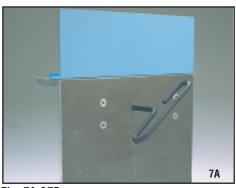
A &7B Type 1L Latch and slot Receiver coupling metal hood to frame or modular units. Can be sealed. (See TDS 43 & 45)
